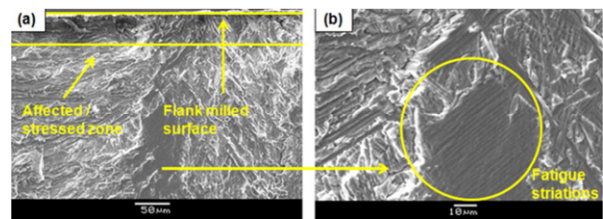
(a-b). SEM micrographs showing Ti6246 fracture surface / crack initiation site in a flank milled specimen
